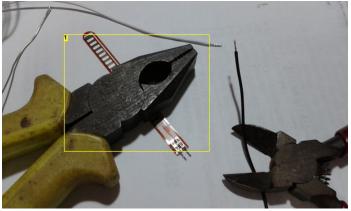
use a heavy object such as a plier to hold down the flex sensor while soldering.
